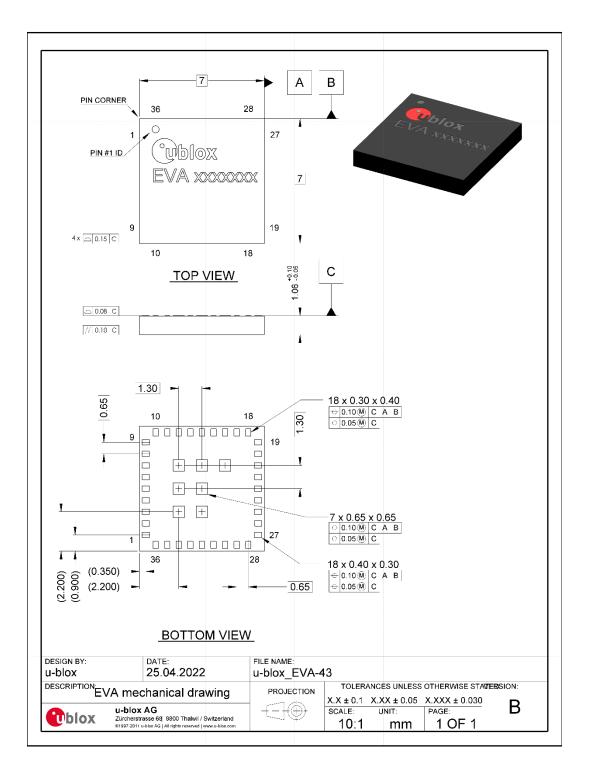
Mechanical drawing for EVA-M8Q (LGA43)
